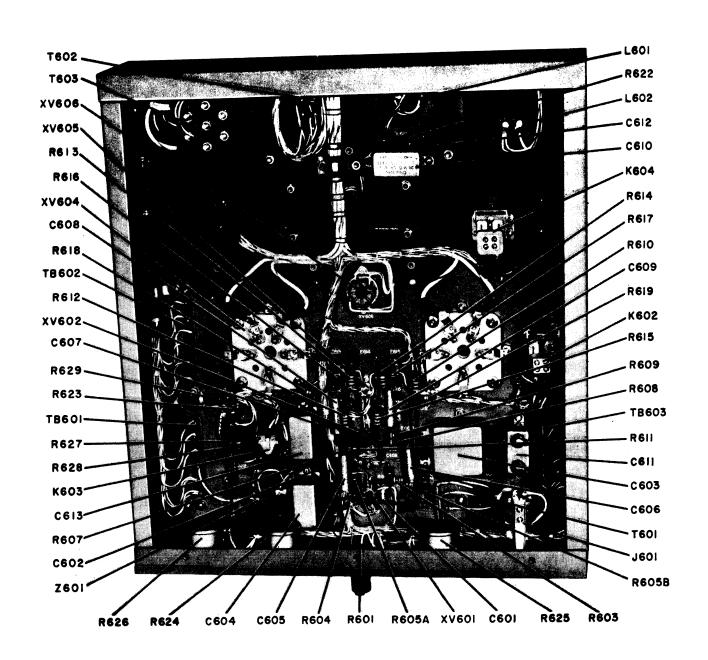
Modulator Assembly, Audio Chassis, Bottom View, Location of Parts
